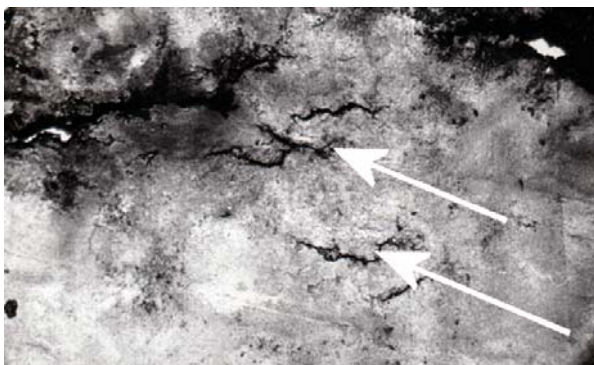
Cracks of the lead coat for the old design of paper insulated MV cable
